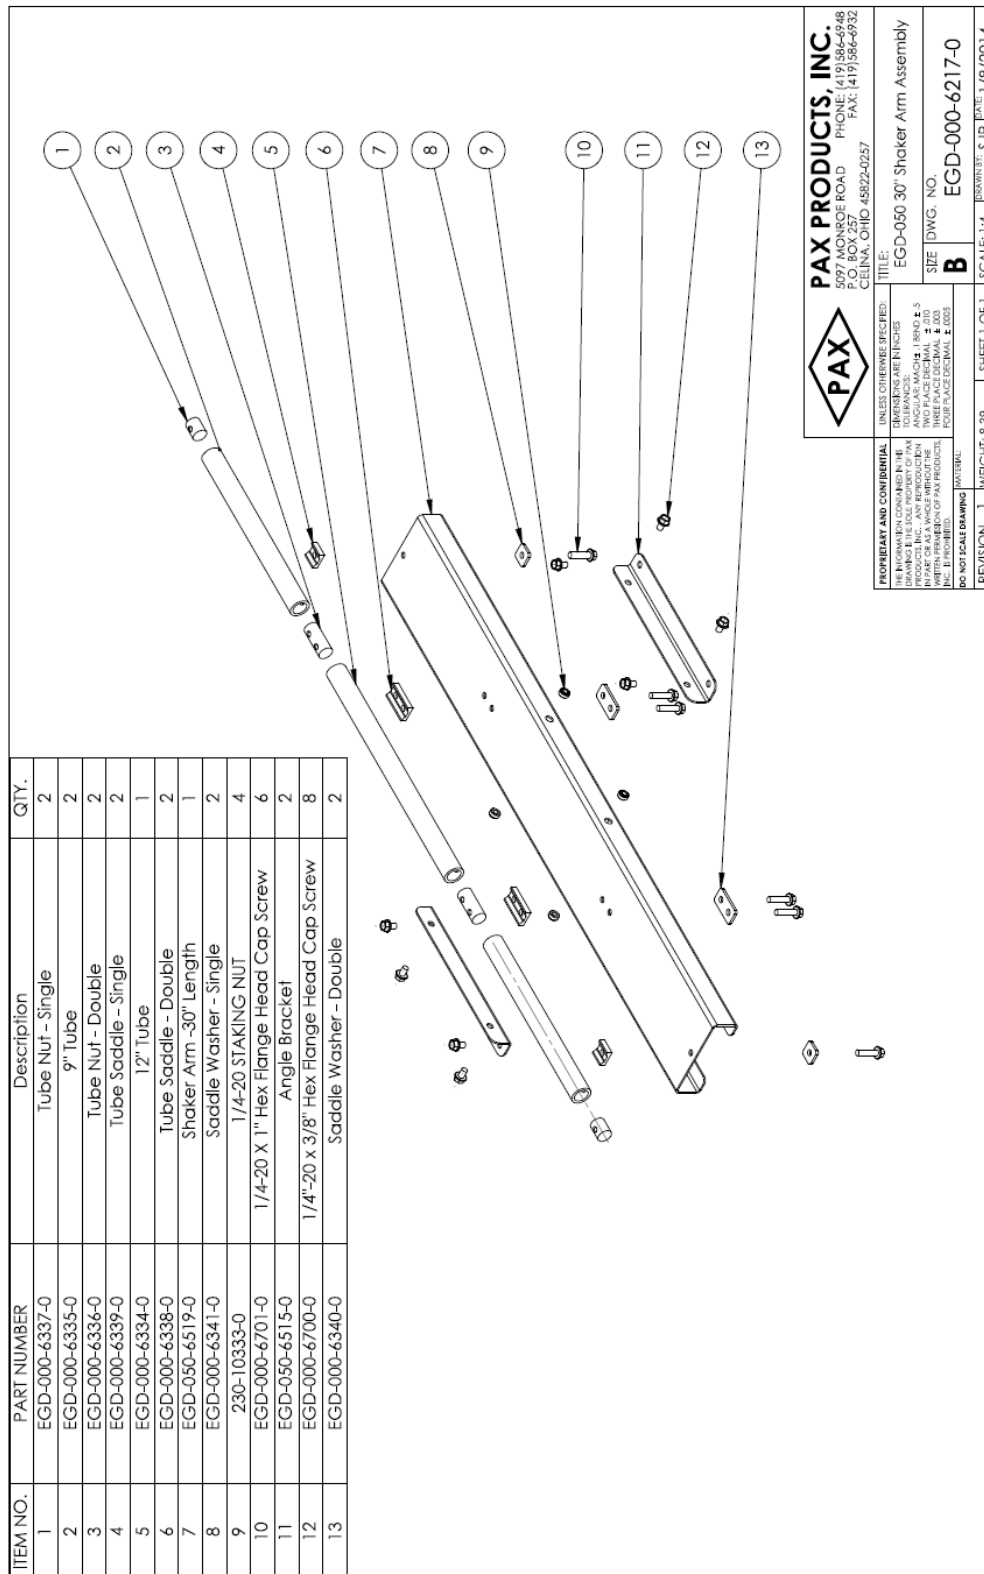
EGD-000-6217-0 EGD-050 30" SHAKER ARM ASSEMBLY
